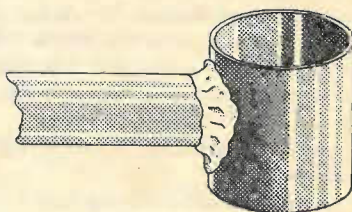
Method of mounting assembly on masthead. Unit is clamped in sleeve.
